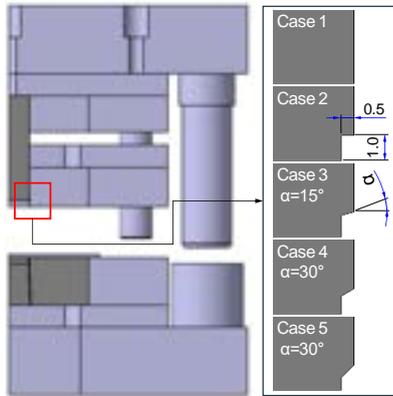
Assembly die 3D model and shape of each type of piercing upper punch
